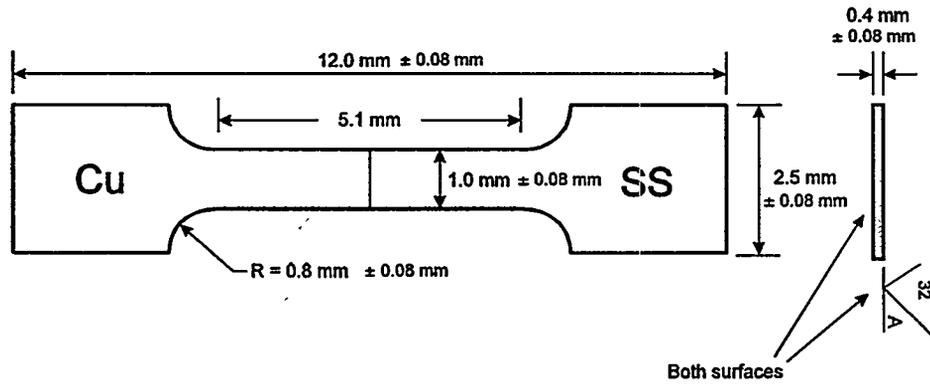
Butt tensile specimen geometry for the Cu/SS joints.
